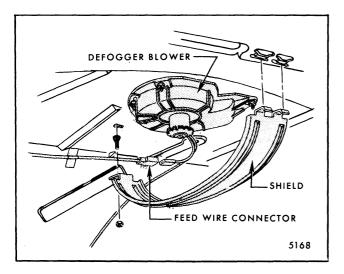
Back Window Defogger Blower Shield - "A" Styles
